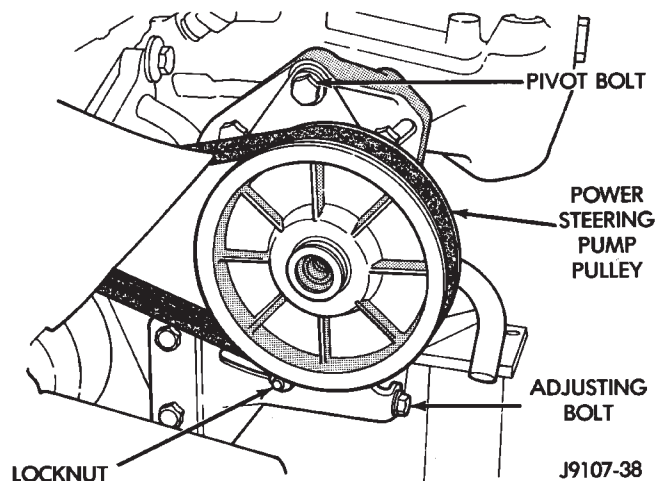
Powering Steering Pump Rear Mounting Bolts—Except XJ With 4.0L
